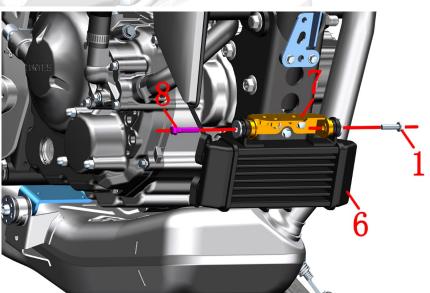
COOLING SYSTEM COMPONENT		Oil cooler component 1	CHK
